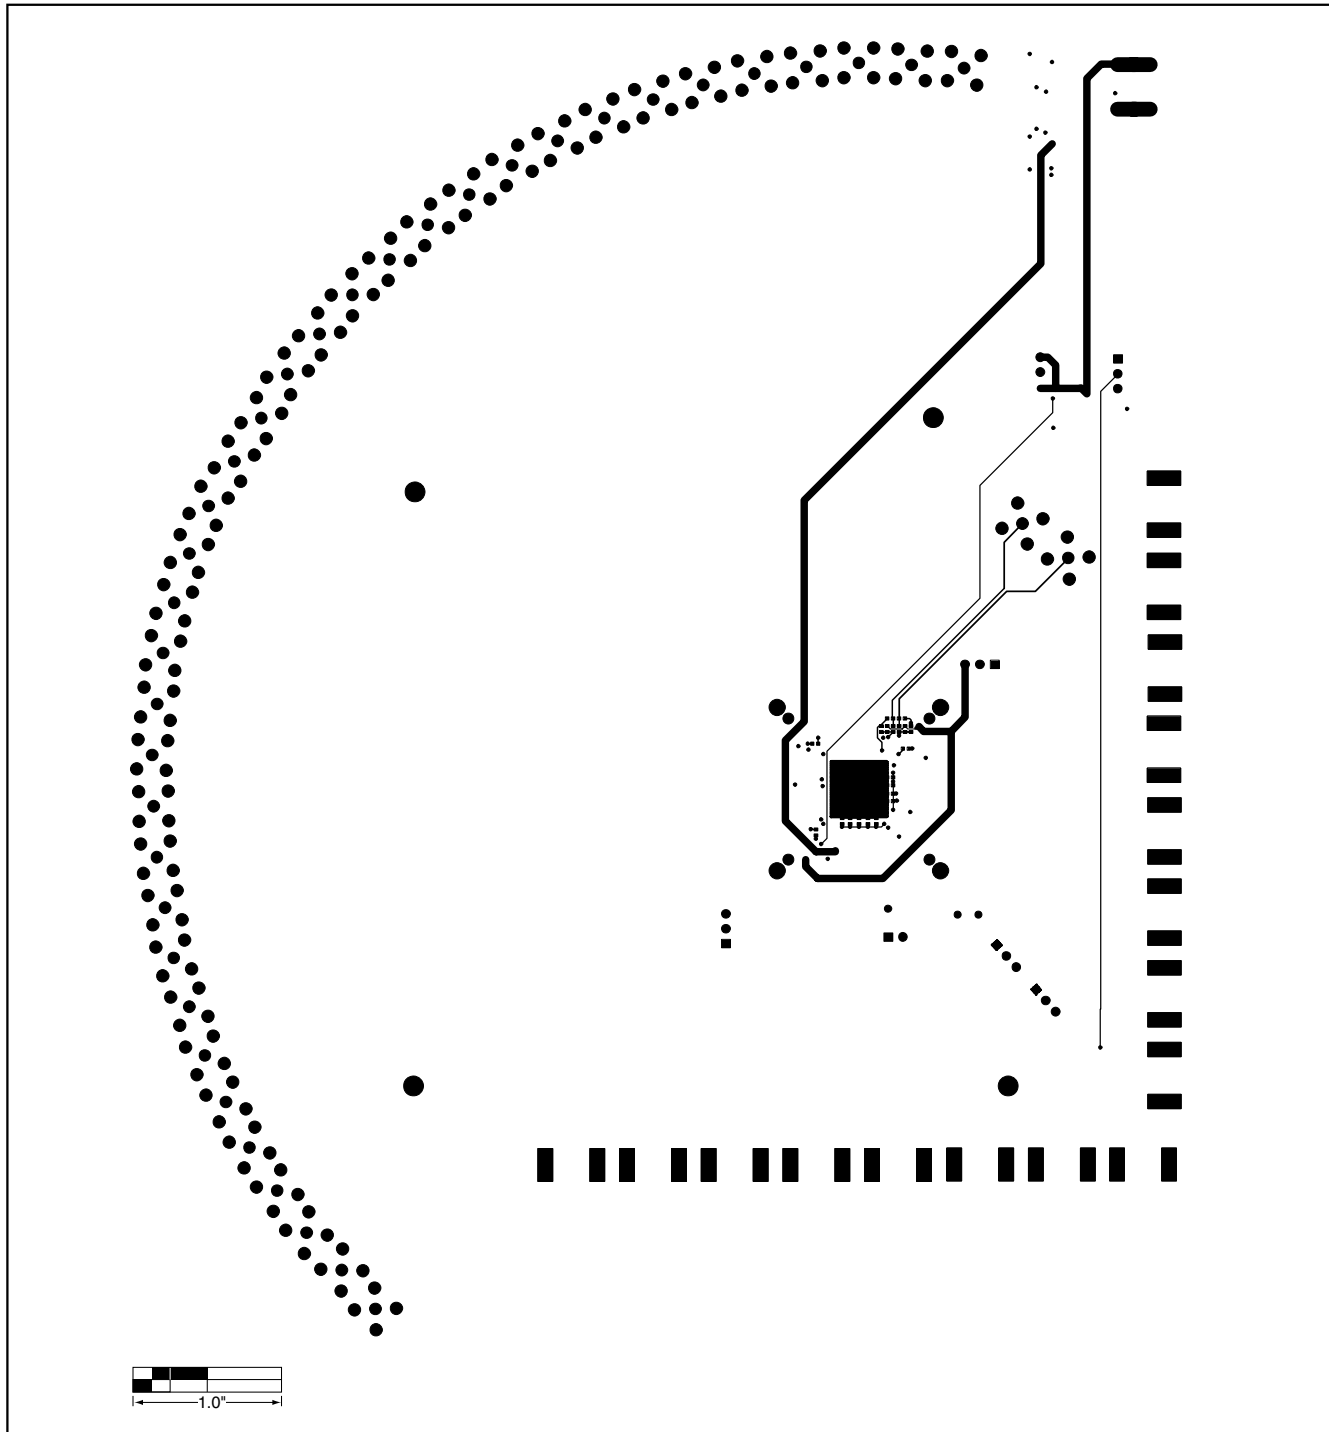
MAX3780 EV Kit PC Board Layout—Solder Side
